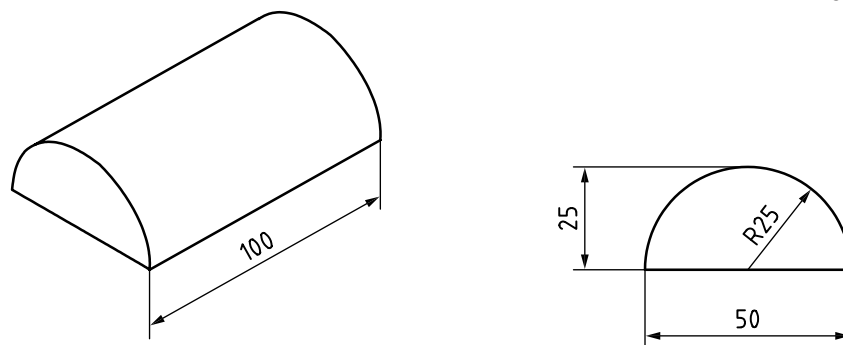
Example of a convex loading pad (dimensions are illustrative only)
